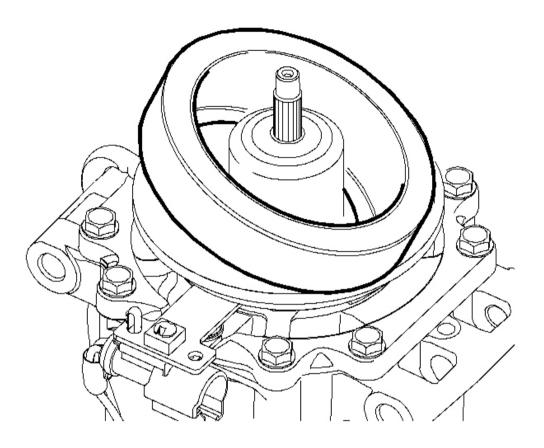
A/C Clutch Field Coil Courtesy of GENERAL MOTORS CORP.
